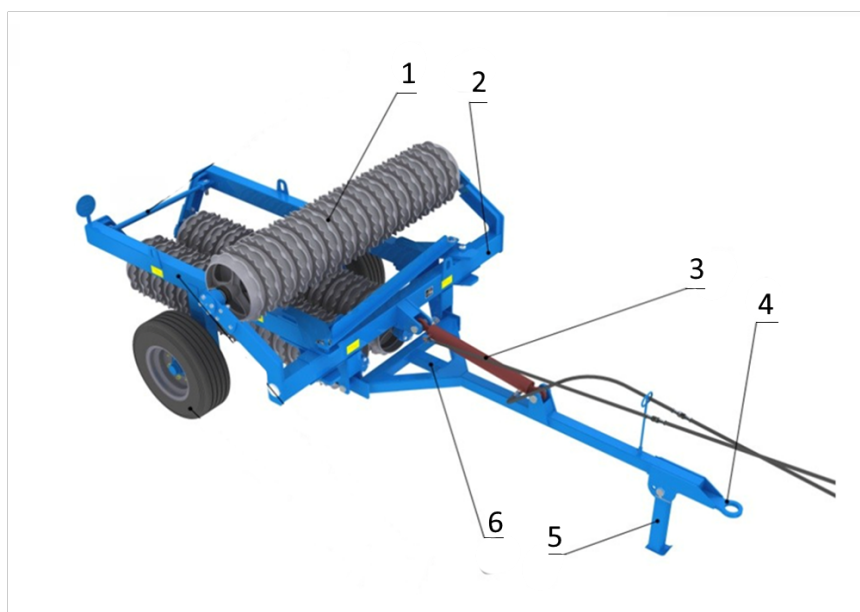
The main components of the ring-spur skating rink RSR-6 , ring section 1, frame 2, hydraulic cylinder 3, hook 4, support 5, drawbar 6.
